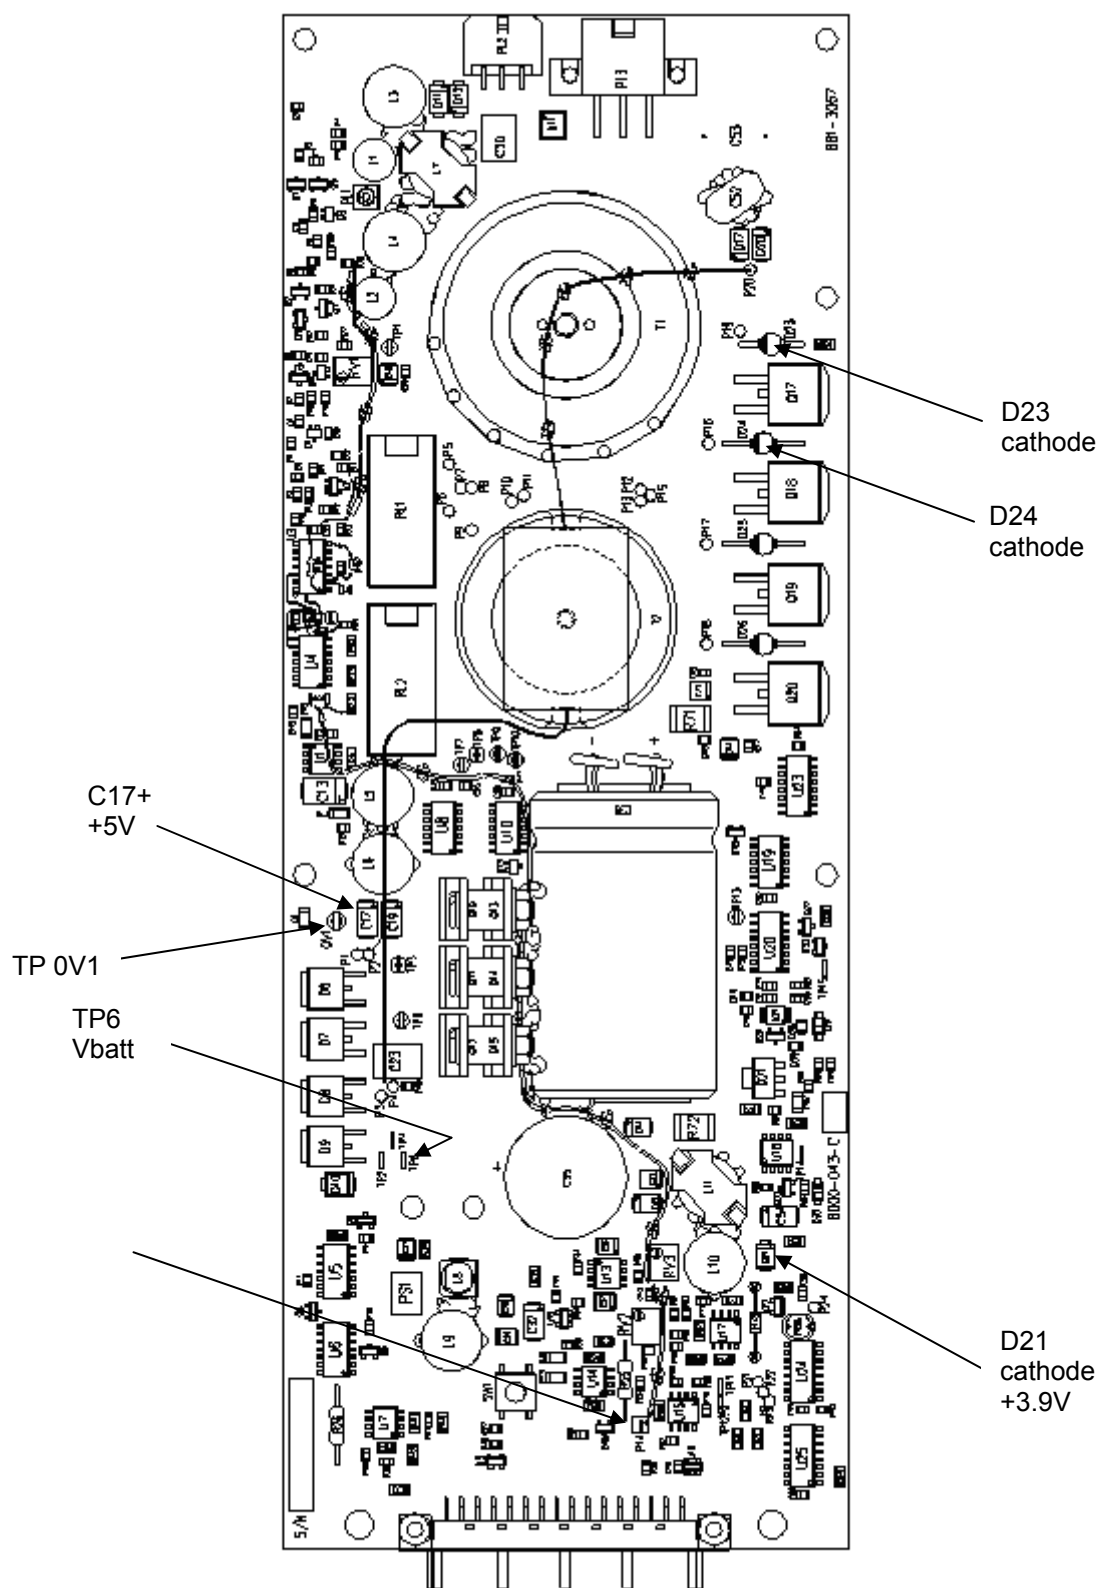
A 8000-043 TX/PRE_AMP BOARD - ISSUE E
